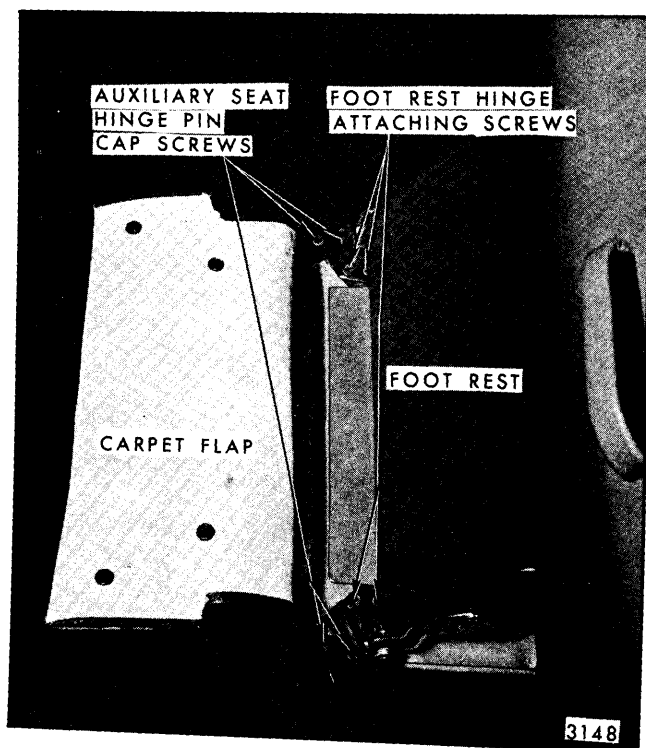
Auxiliary Seat Assembly - Removal and Installation - Cadillac Limousine Styles
